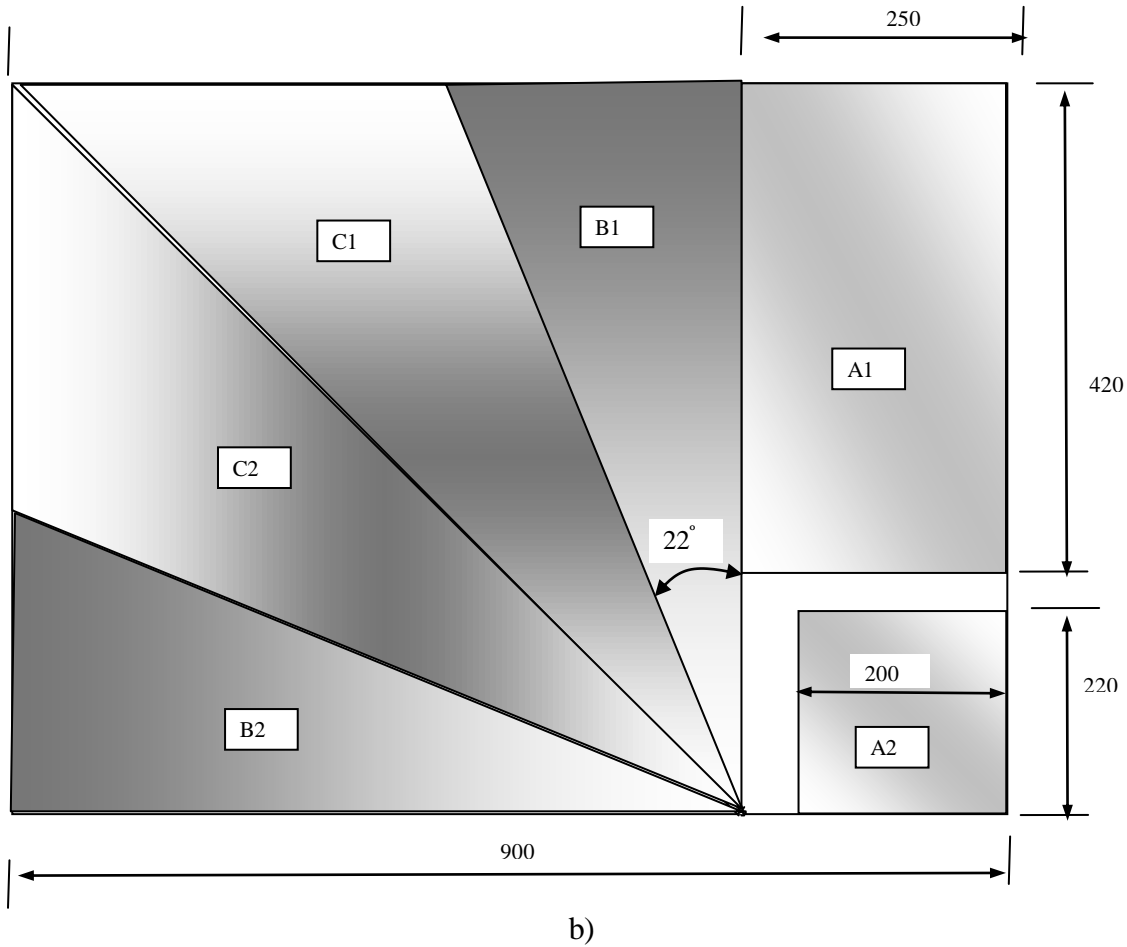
Dimensions (in mm) for cutting the mirror pieces :a ) one half part and b) other half part.
